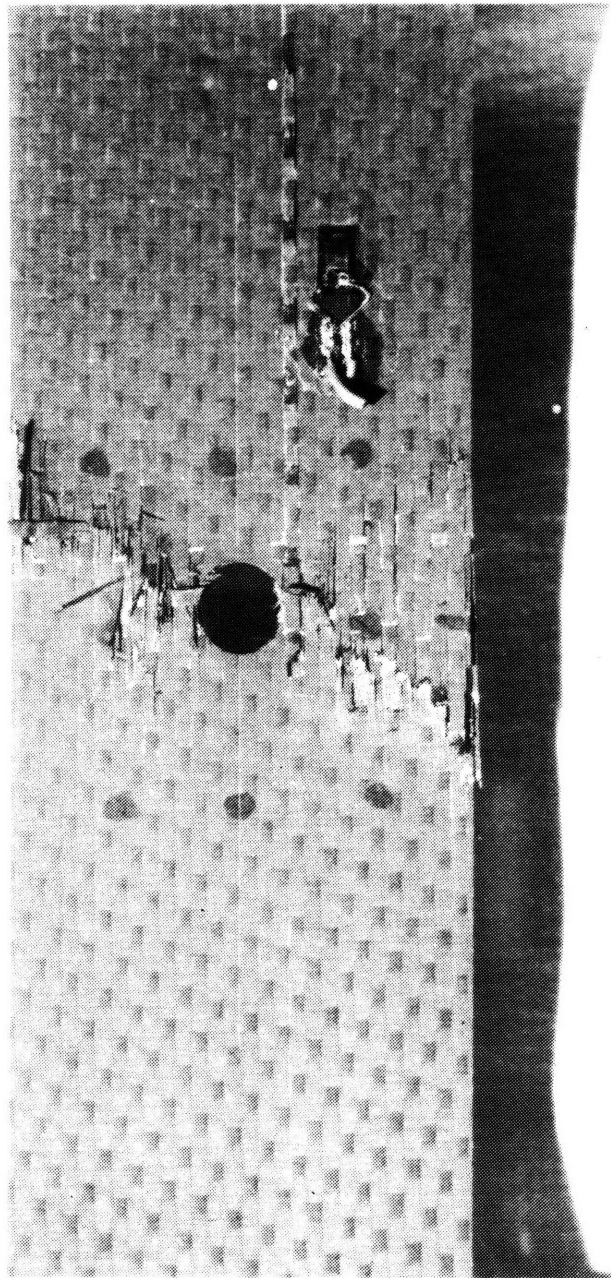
Photograph of Failure of Specimen with 12.7 mm
